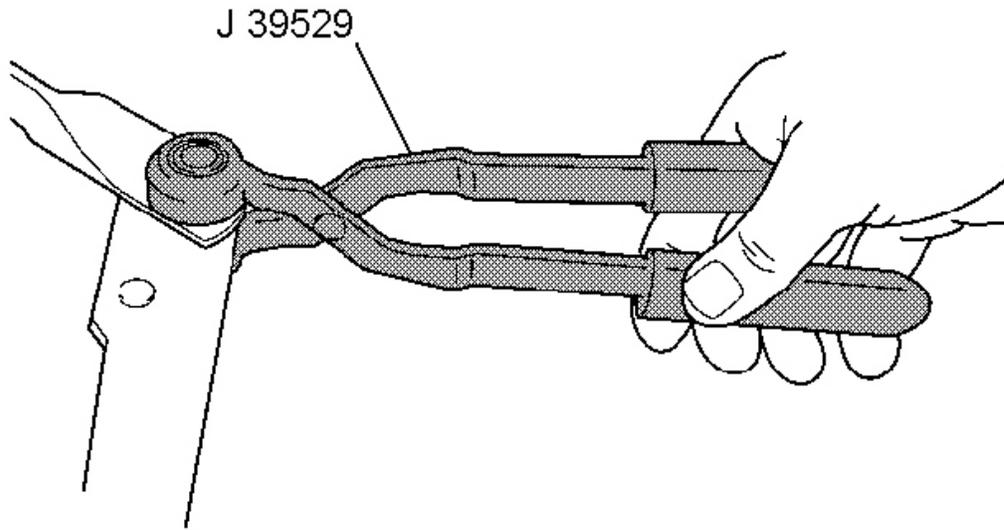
Installing Wiper Transmission To Wiper Motor Crank Arm
